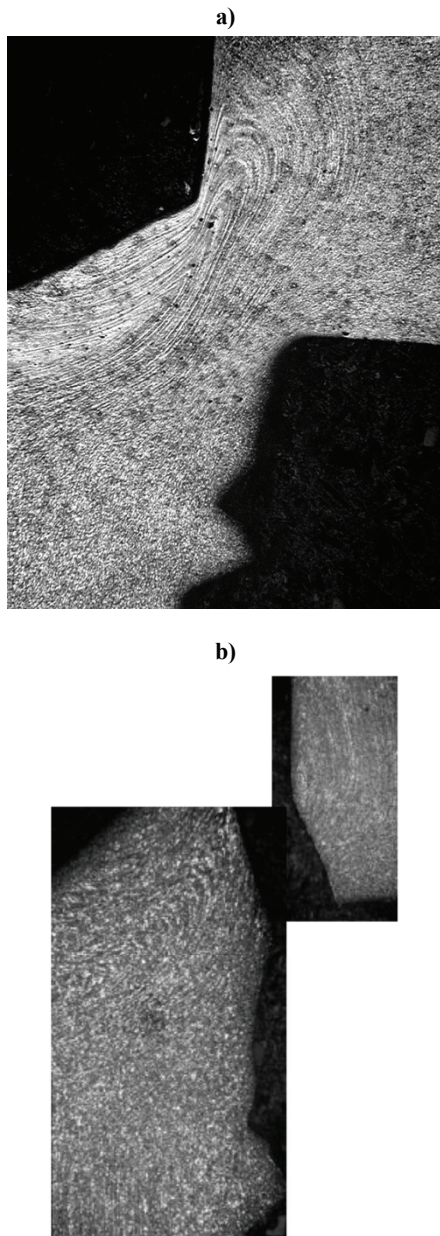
Misalignment between the fibres and the shape of the screw (a) and crack occurring during tensile test, caused by this misalignment (b).
